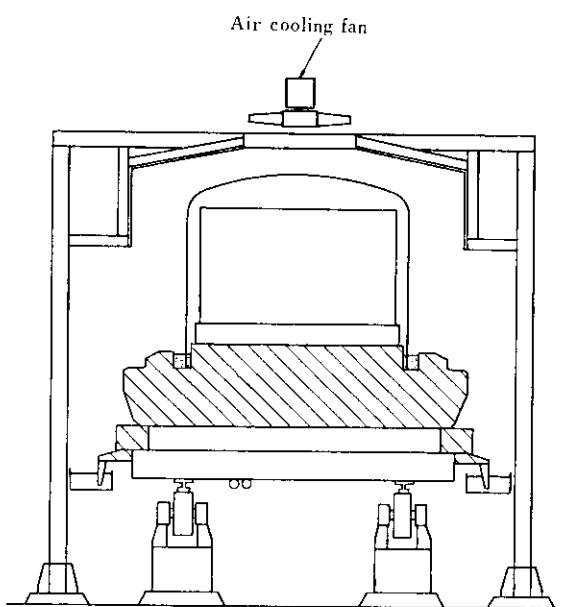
Sectional view of No.4 cooling zone of KSR furnace
